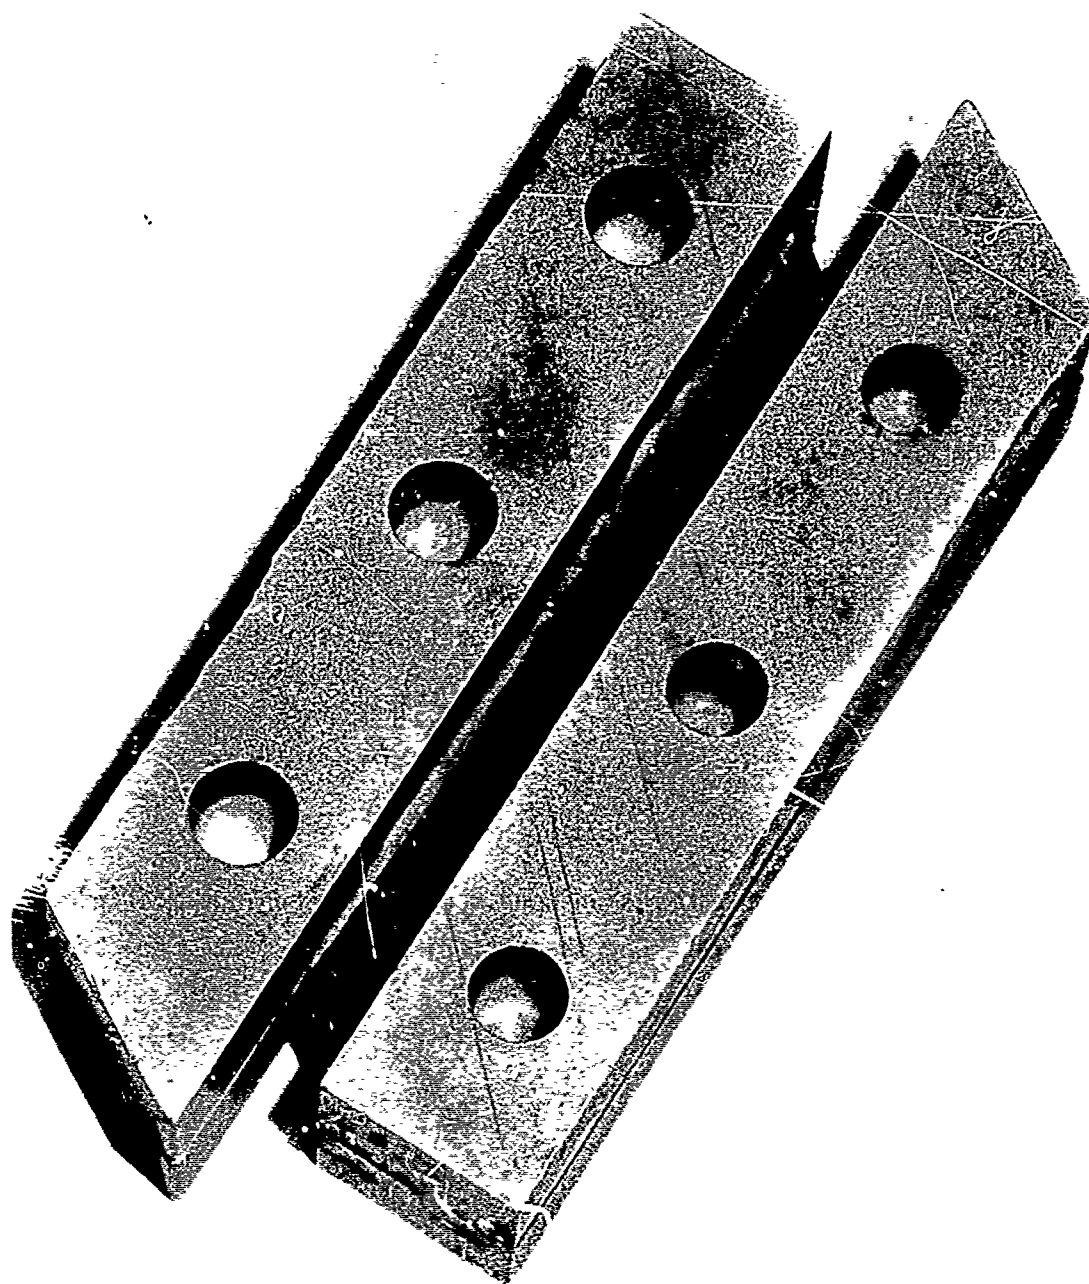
Failed Rail Shear Specimen — Rails Bonded In-Place
